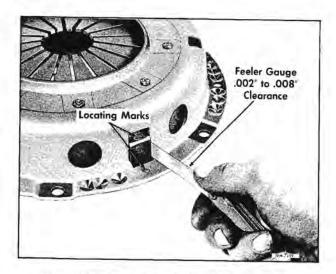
Clutch Cover To Plate Alignment Marks and Driving Lug Clearance Check
